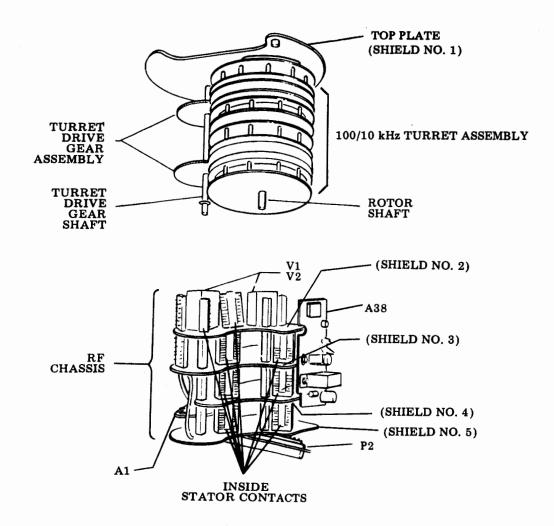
RF Amplifier Assembly A2A4, RF Chassis and Turret Assembly, Disassembly Parts Location
